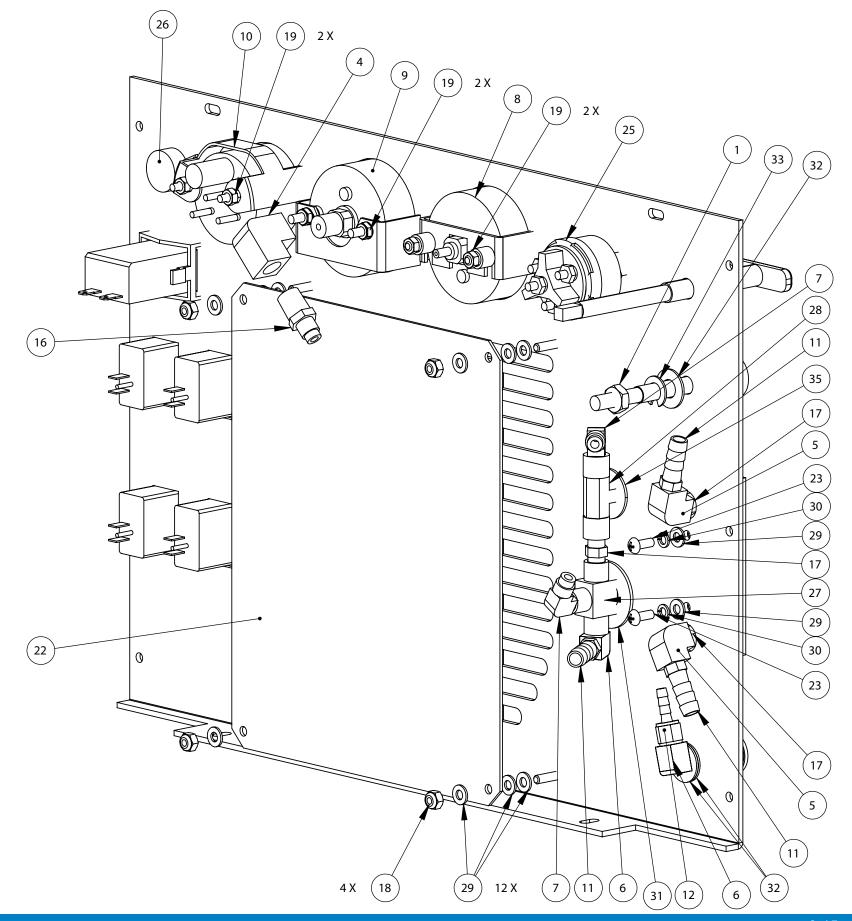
Dash Assembly - View 1 of 2 610-018-720 Rev. J
